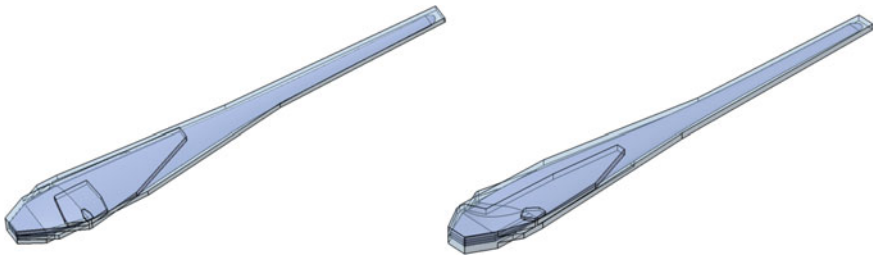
CAD model of the wind turbine blade master plug (pressure and suction sides)
